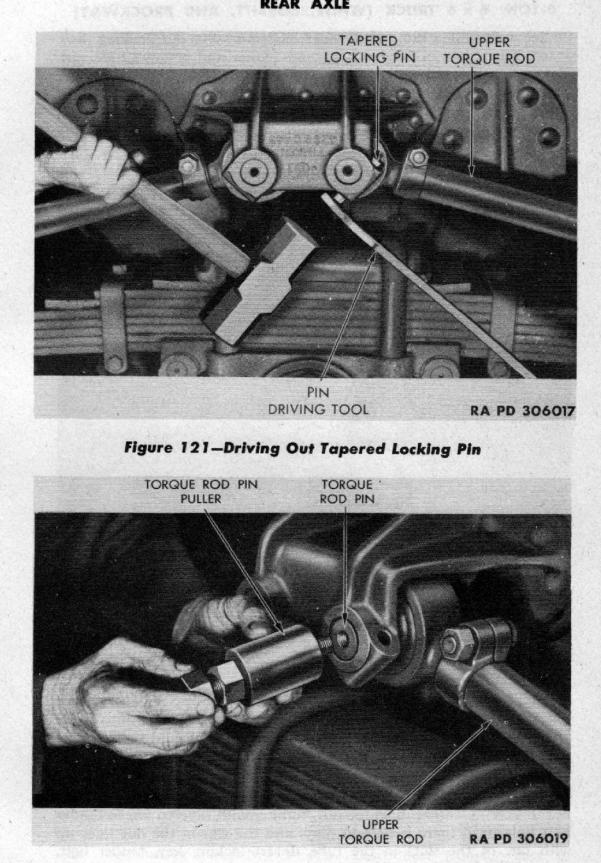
Installing Puller on Upper Torque Rod Pin 219
